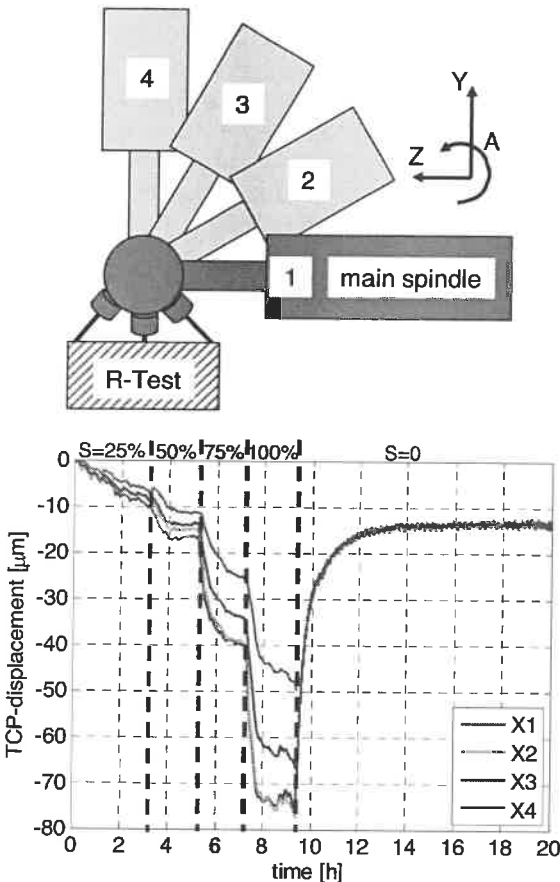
Top: measurement setup for a five-axis-milling machine. Bottom: thermally induced TCP-displacements in X-direction caused by rotating main spindle at different speeds (S).
